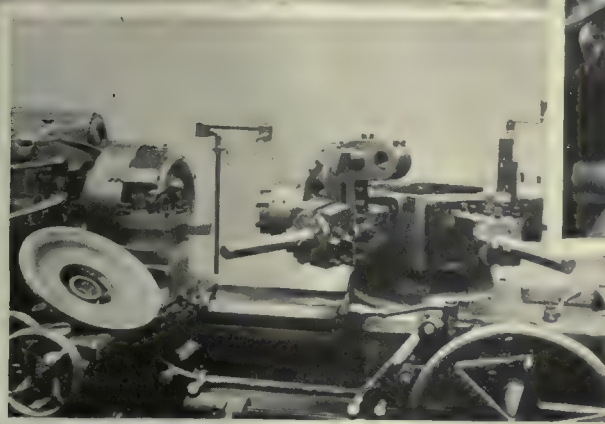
Finishing the other or convex side of the same clutch cover plate. The tool and the roller and form which guide it are shown. This method of machining reduced the time per cover from $1\frac{1}{2}$ hr. to 30 min. The machine is a Warner & Swasey 3-A universal turret lathe.
